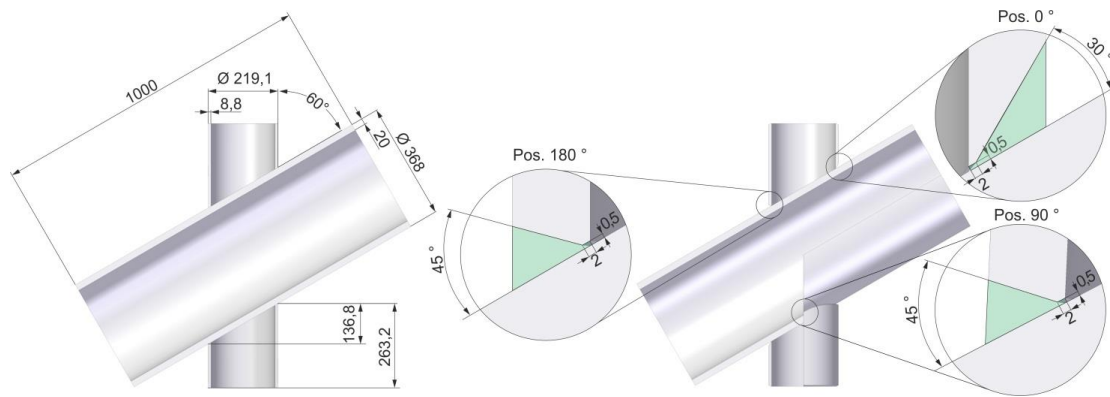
Geometry definition and weld seam preparation for the automated welding of the tubular X-joints, (2)
